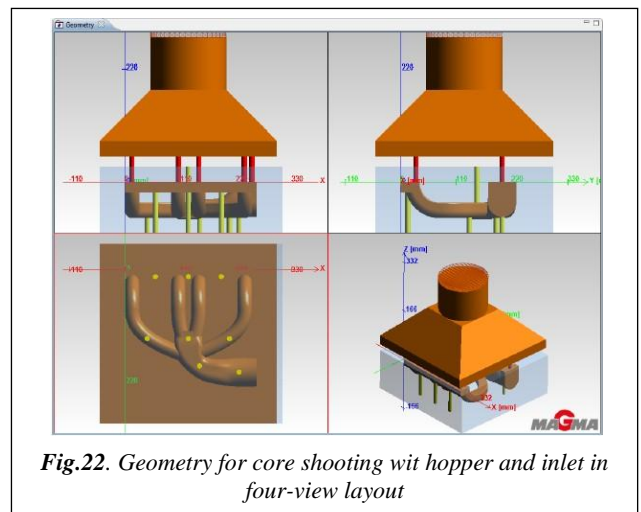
Geometry for core shooting wit hopper and inlet in four-view layout
